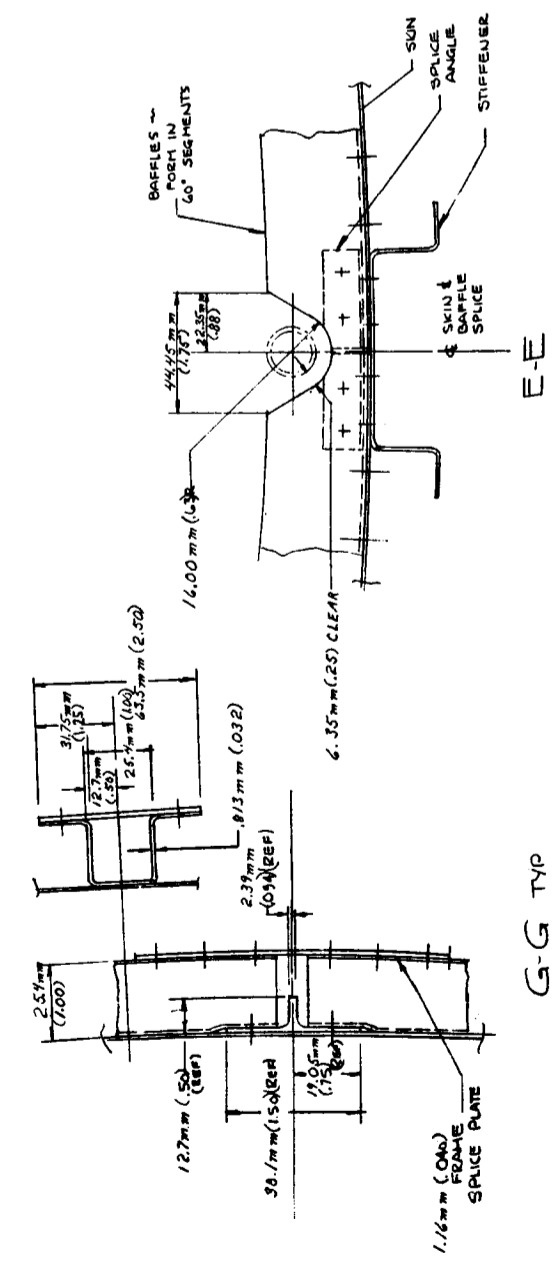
Sun shield assembly (dwg. no. SK-LST-018)
